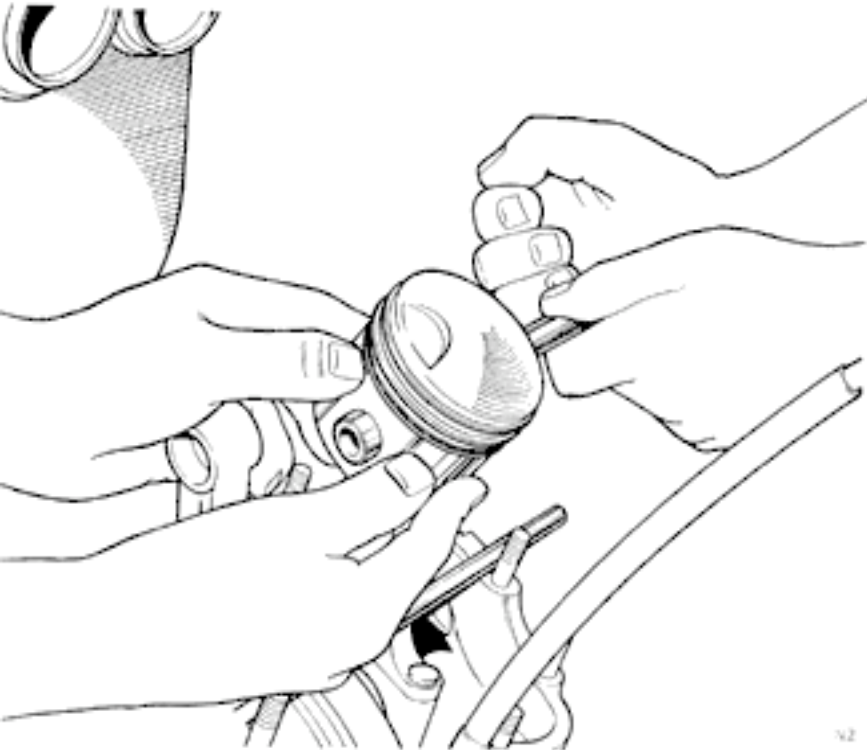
Support connecting rods to prevent damage against crankcases
